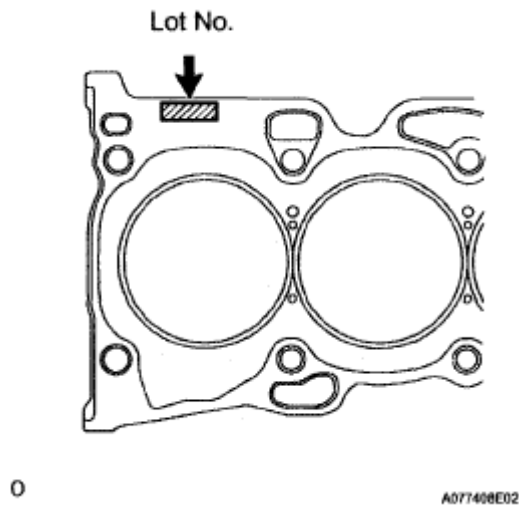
Identifying Cylinder Block Surface With Lot Number
